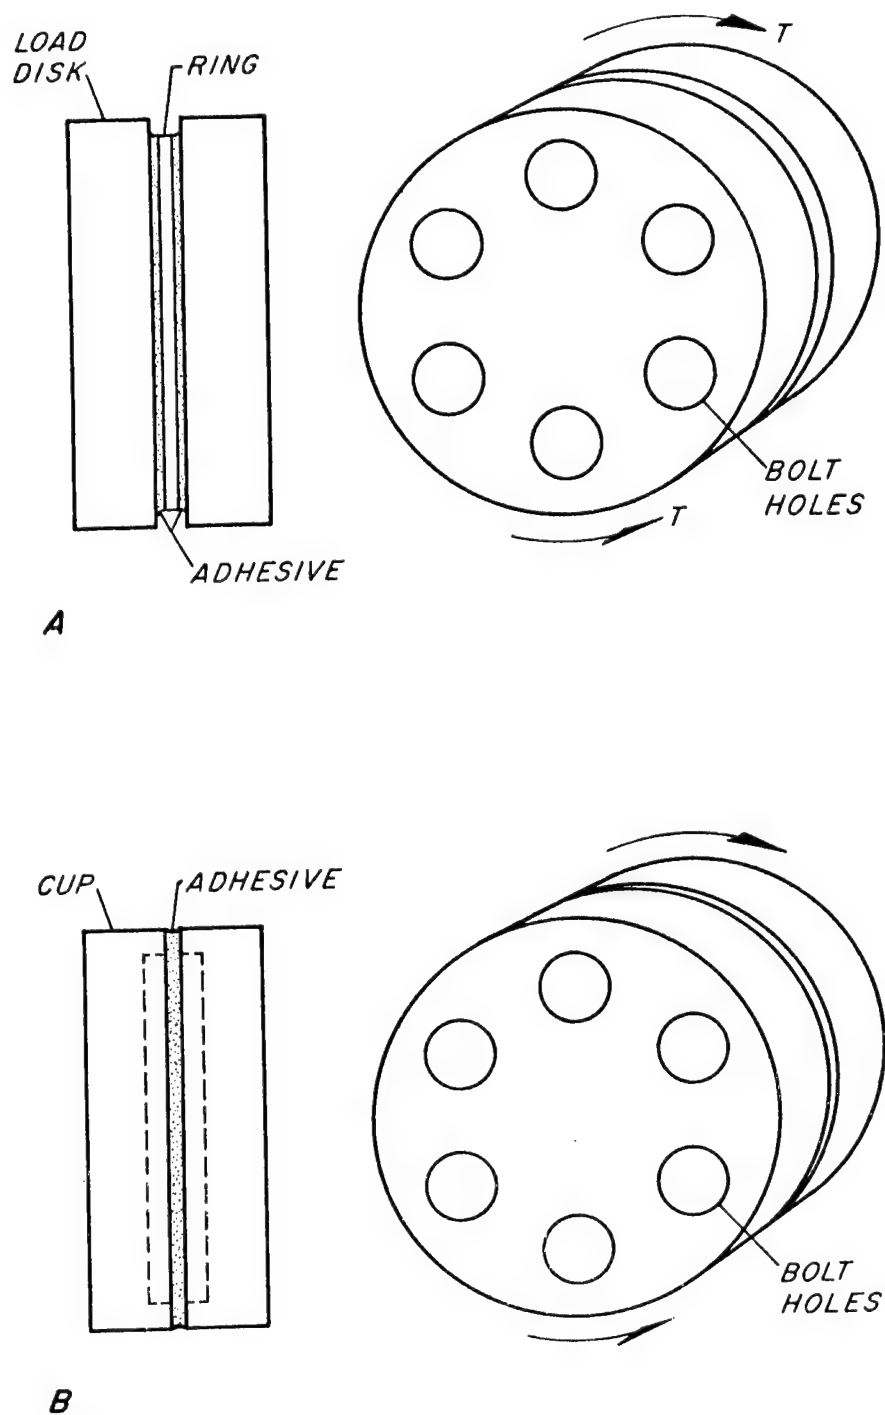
Cylindrical Torsion Specimens; A, Disk Ring Type; B, Cup Type.
